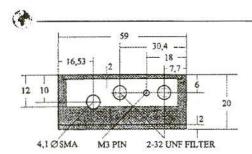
Dimensions of the Telemeter ZG4-2-N Housing in mm
